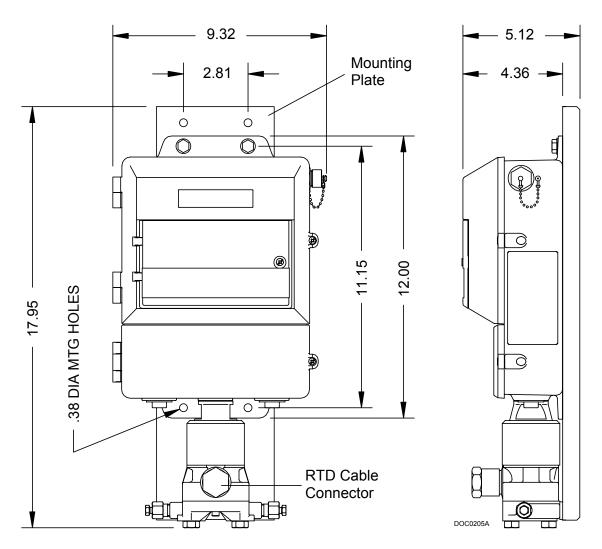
FloBoss 407 Outline and Mounting Dimensions
